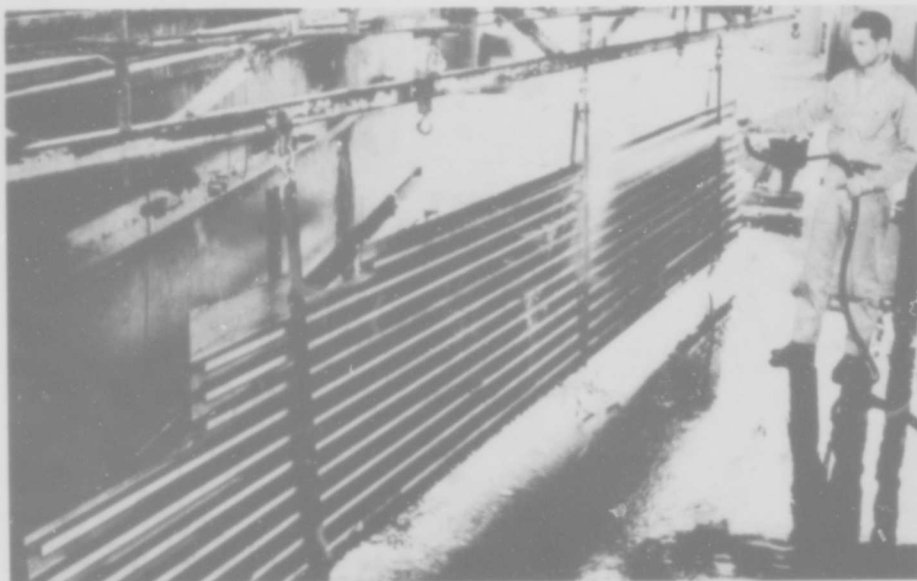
RINSING SECTION OF FULL-SCALE PANEL⁽¹¹⁾
